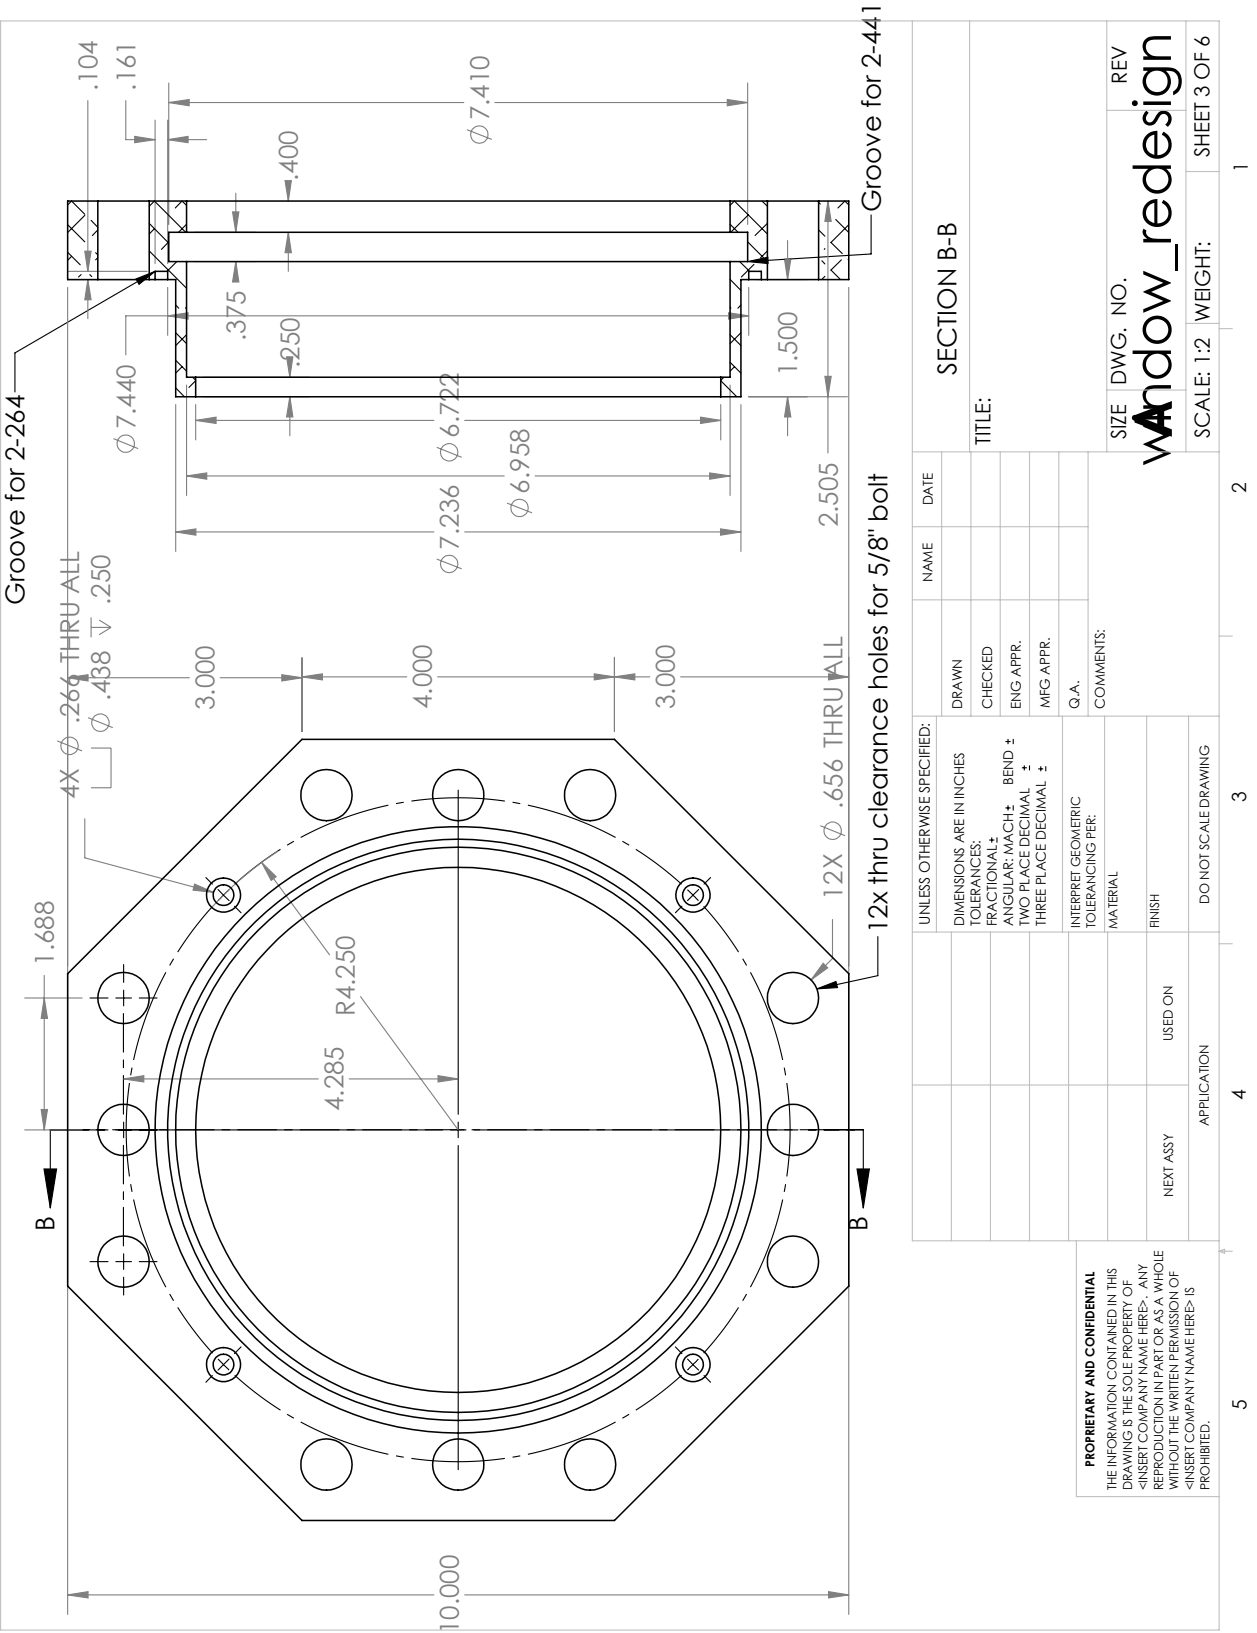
Drawings of the redesigned GDT test section window, part 3.
